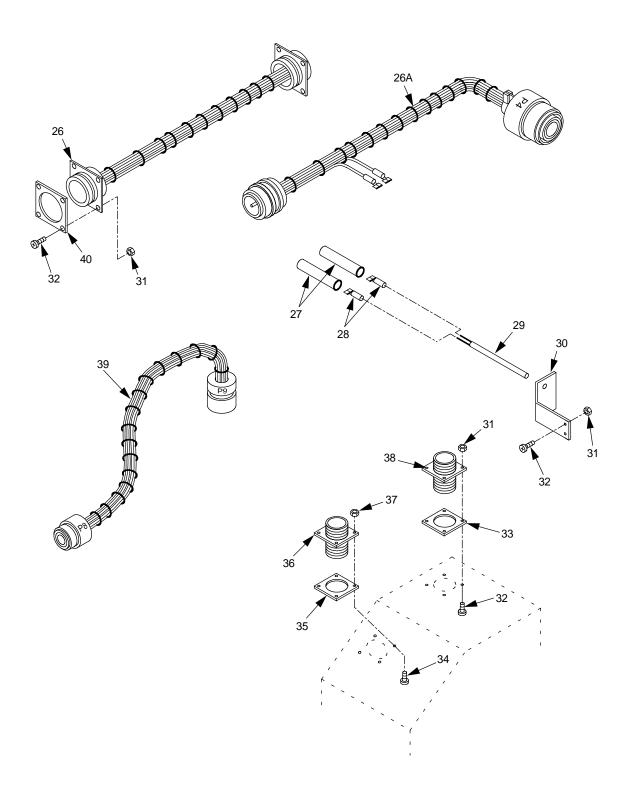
Evaporator Assembly (Sheet 2 of 4)
